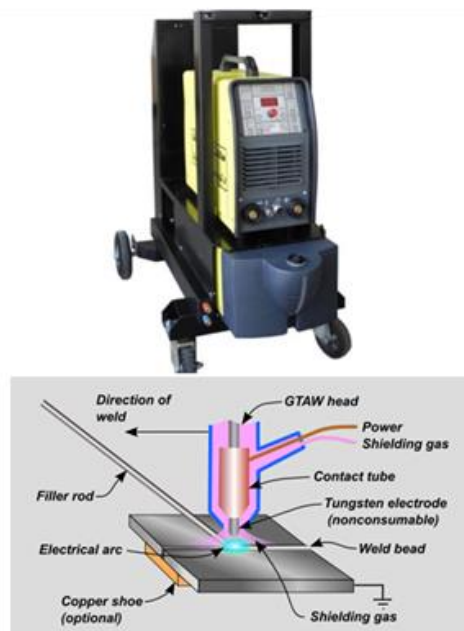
Schematic illustration of TIG welding process and the welding machine used
